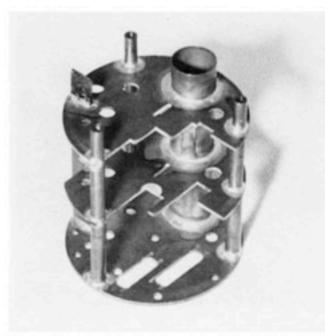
C. A high frequency measurement probe is composed of three boards p.c. with fixed three vertical copper screw spacer bolts and one circular copper waveguide. Soldering with an iron did not work. Use of
